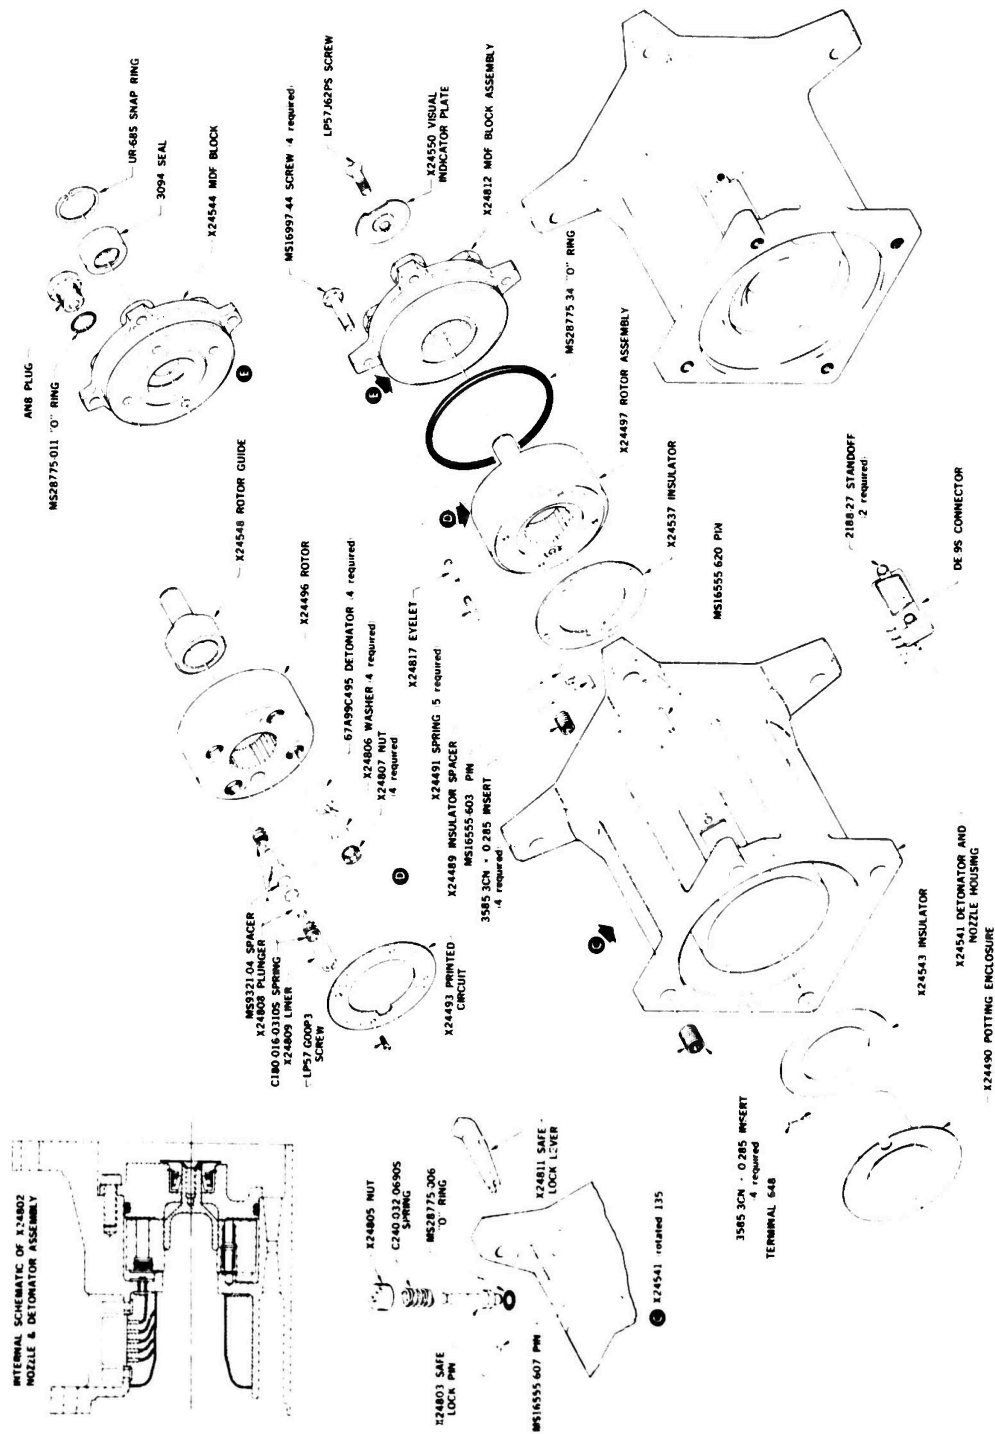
PHASE II DETONATOR &amp; NOZZLE ASSEMBLY &amp; MDF BLOCK
